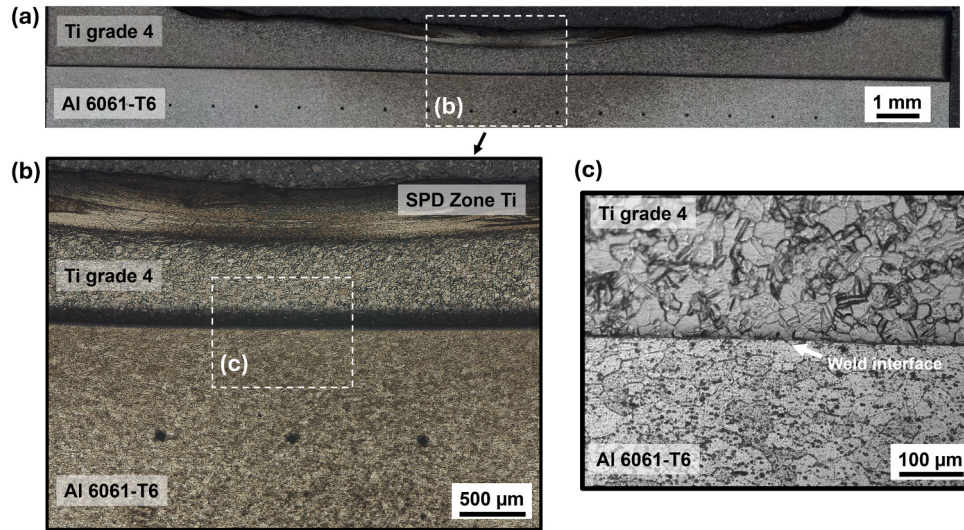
Etched cross-sections of spot FMB Ti-Al weld with counter-pressure: (a) optical micrograph of the full weld cross-section (b) enlarged view of the weld center highlighting the severe plastic deformation (SPD) Zone in Ti Grade 4 (c) enlarged view of the Ti-Al weld interface.
